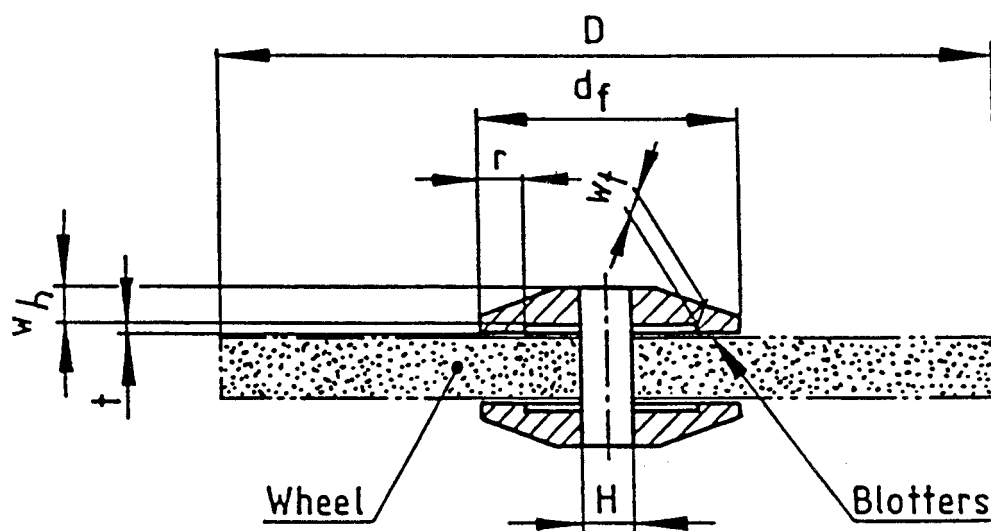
Flange for straight grinding wheels of type 1 and grinding wheel recessed on one side of type 5
